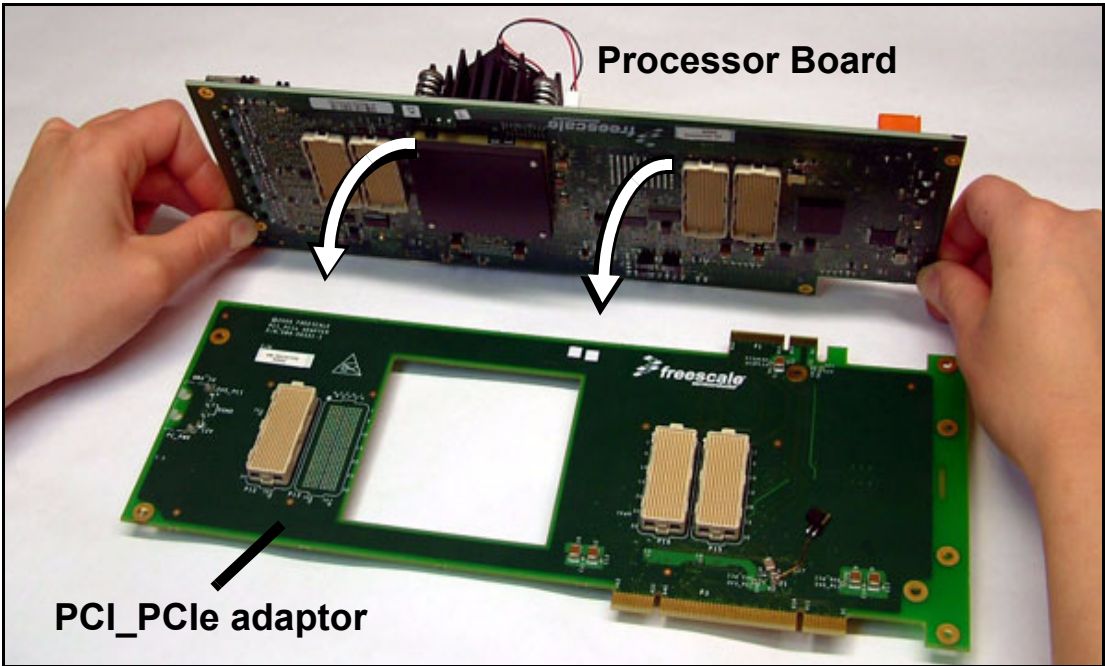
Fastening the PCI\_PClE adaptor to the MPC8568E MDS Processor Board
